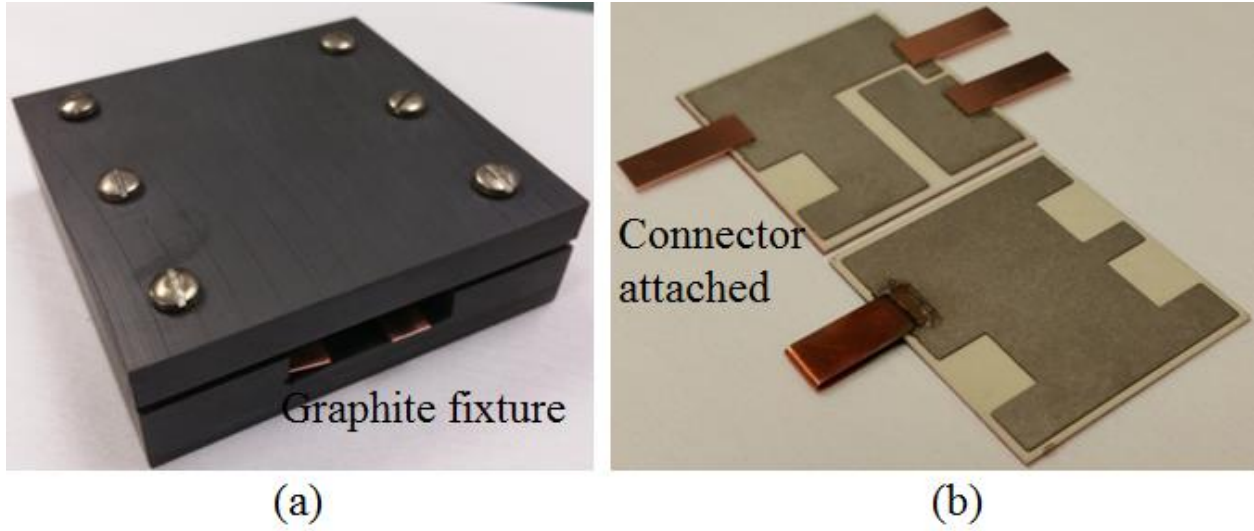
Graphite fixture for solder reflow, (b) connectors attached to the DBC
